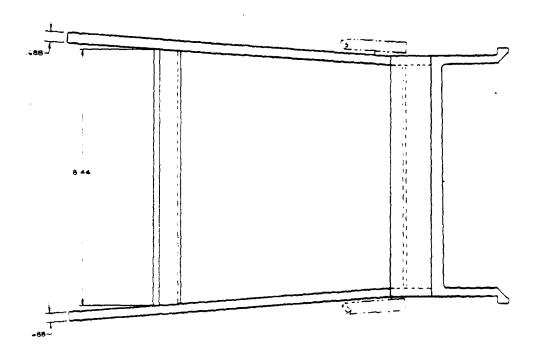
Dimensionalized Drawing of MPES Seat Structure (Rear View)
